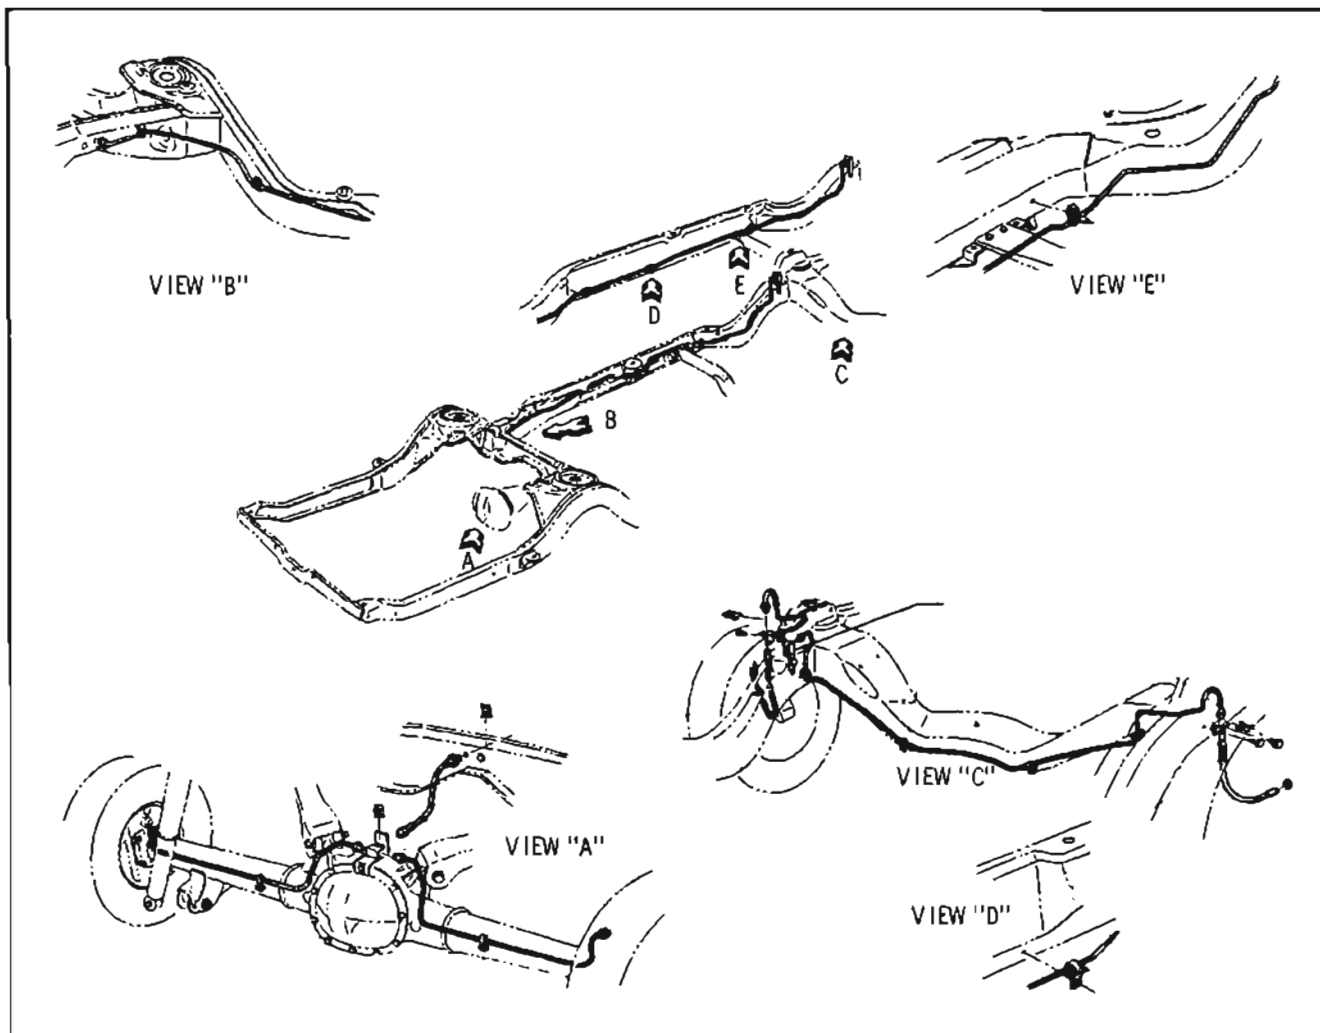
Brake Lines (30, 31 & 32 Series)
